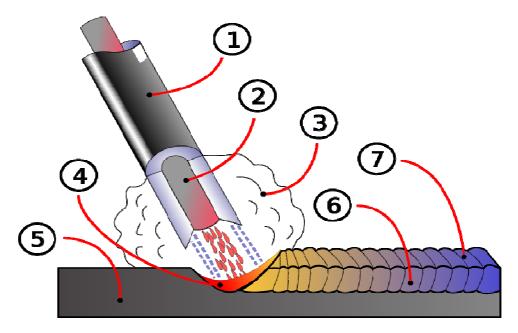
Diagram of manual metal arc weldig – MMA welding
